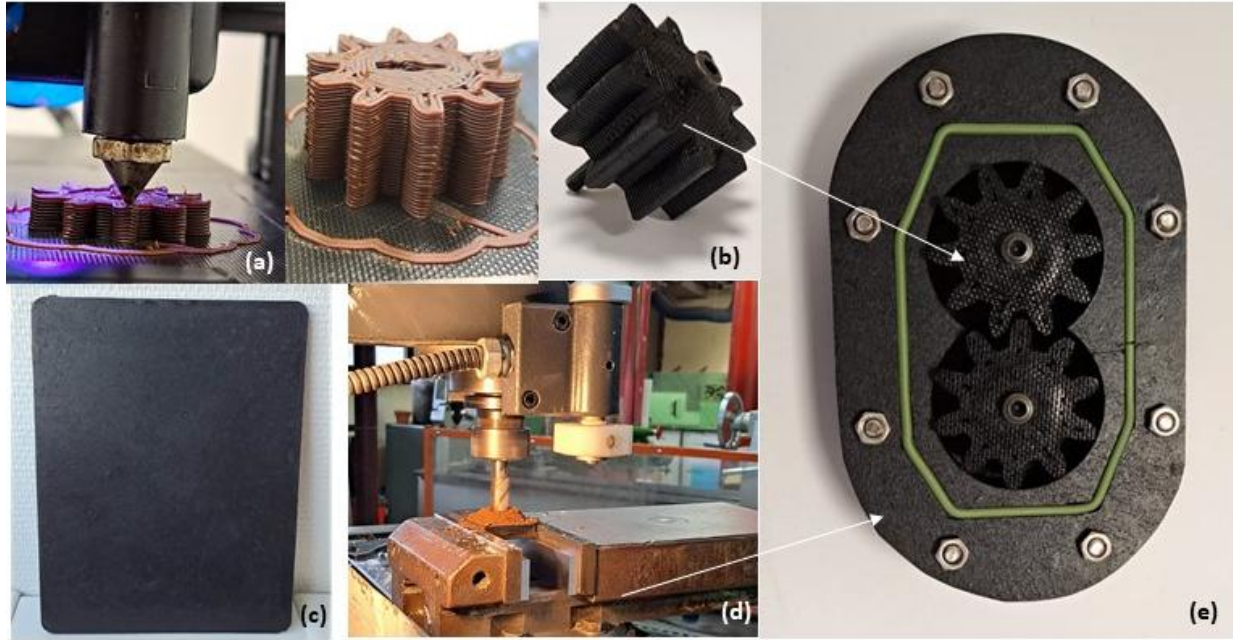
Application cases of the developed biocomposite using (a) DIW 3D printing process to manufacture (b) a gear and (c) compression molding to obtain a 4 mm thick composite sheet. The composite sheet was further (d) machined to shape a gear pump casing. (e) The two 3D-printed gears were fixed in the machined pump casing to obtain a static gear pump demonstrator.
